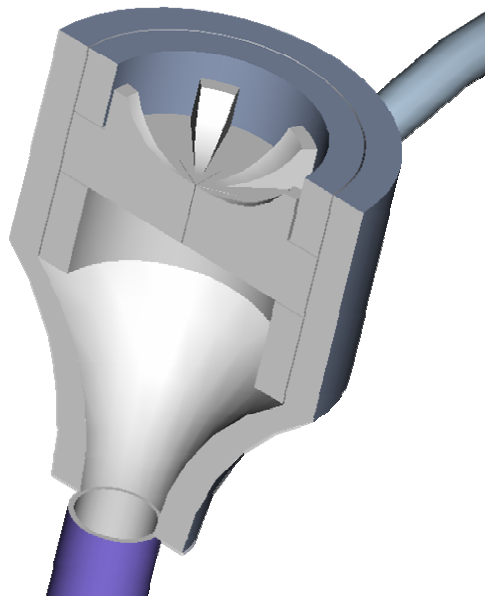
Prototype reinforced star valve integrated into a sheath housing
